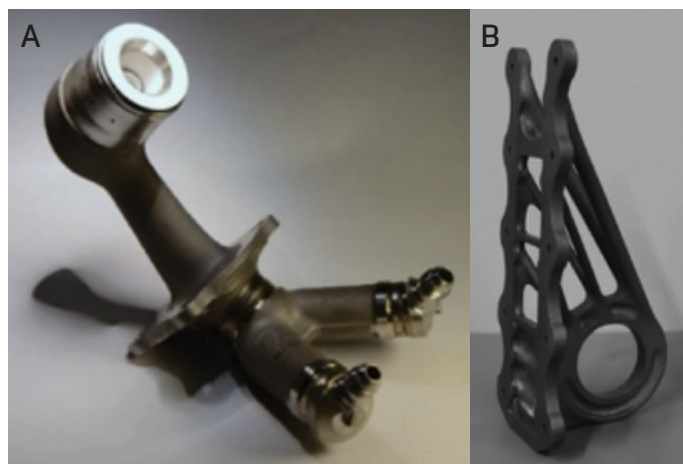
Additive manufactured components produced by laser beam melting: A — Fuel nozzle built as one piece with optimized interior channels; B — Ti-6Al-4V Airbus bracket with reduced weight (Ref. 14).
